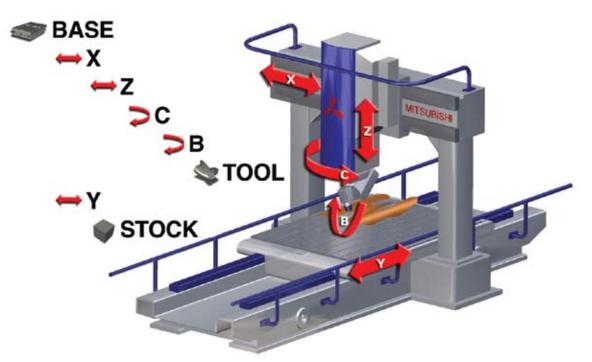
Vertical 5-axis laser machine, with a dual rotary head.
